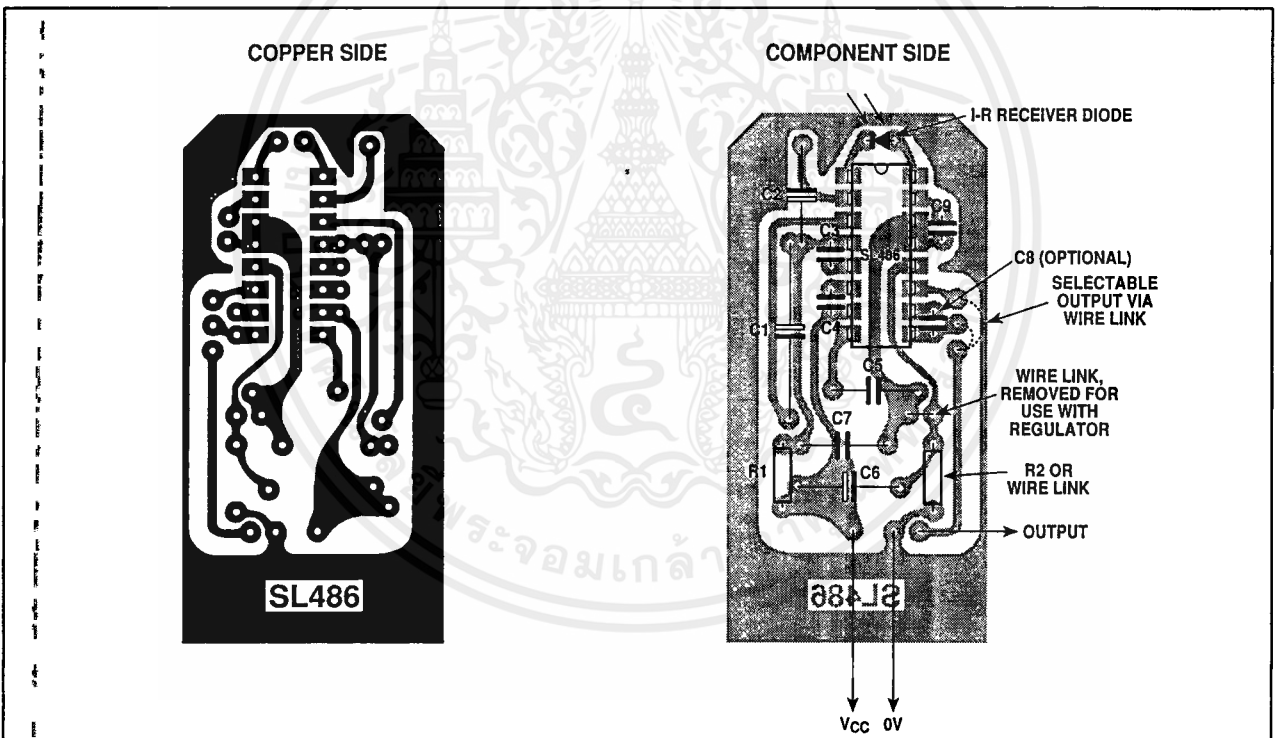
PCB track (actual size) and component layout for the circuit of Fig. 4, using SL486 in DP16 package
